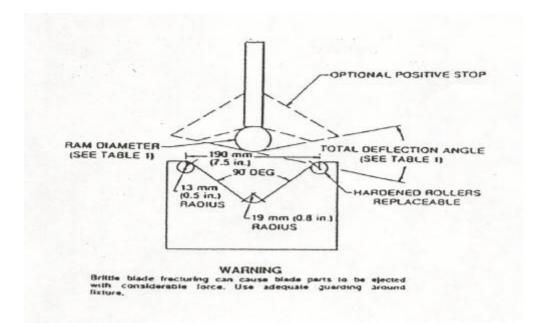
(Blade Bend Test Fixture of Blade Manufacturer)
